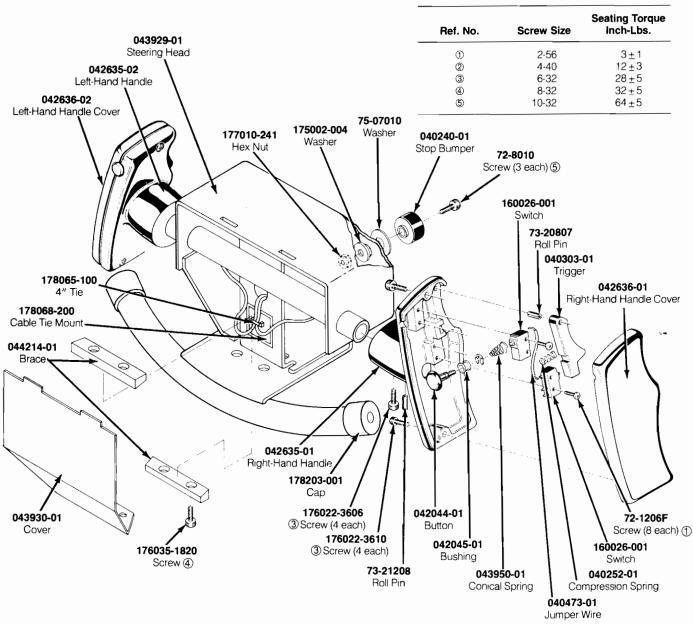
RTC Steering Control Disassembly and Lubrication
